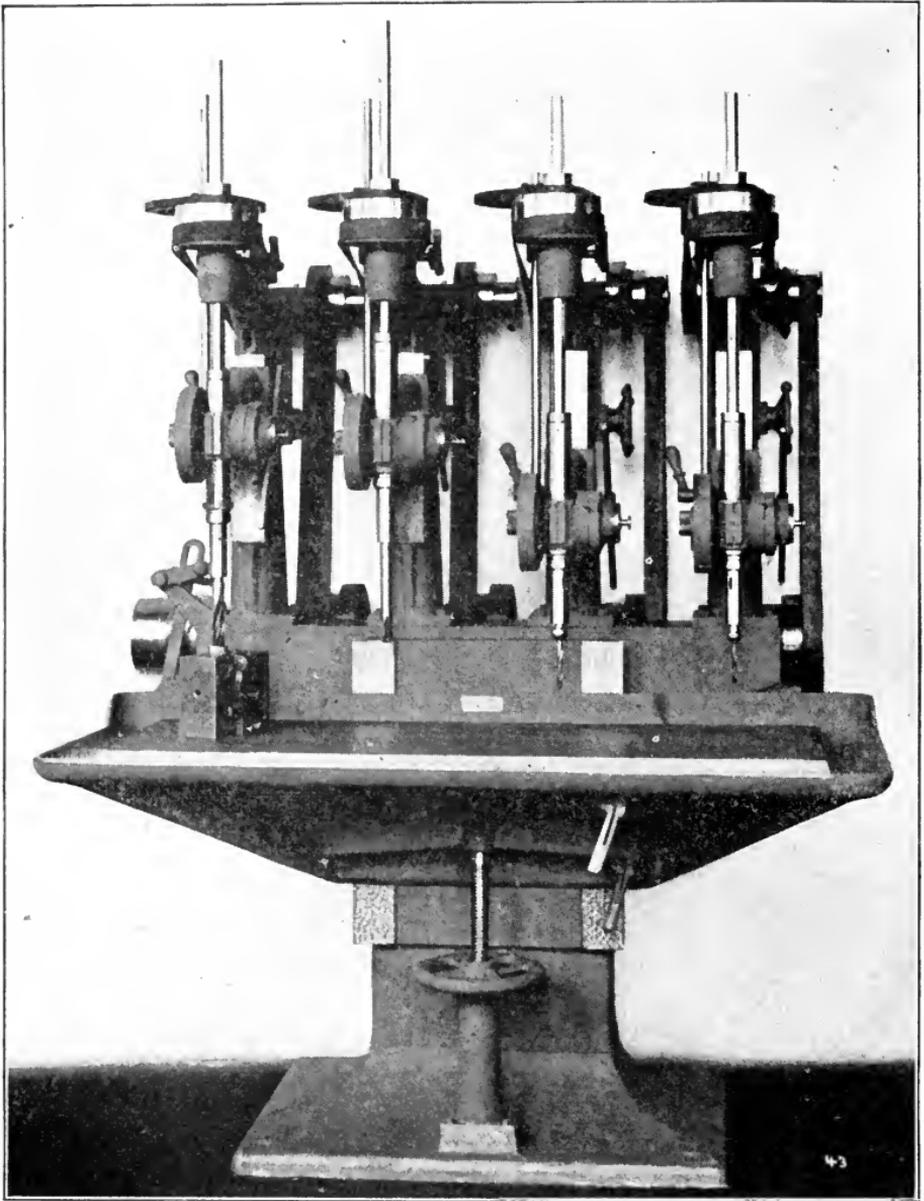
Four-Spindle High-Speed Ball-Bearing Sensitive Driller
